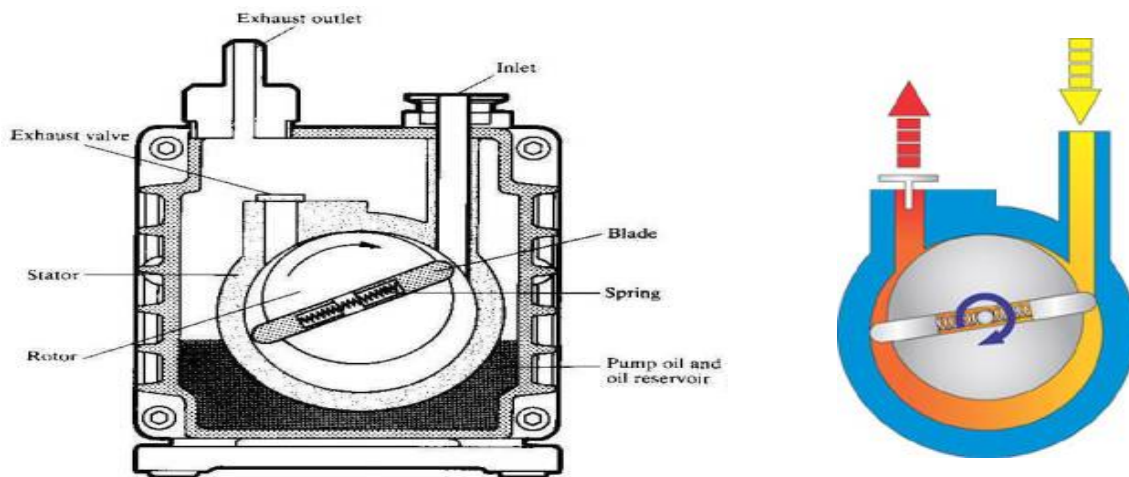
Electromechanical pumps with its main parts [Courtesy of (<http://rice.360.wildapricot.org>.)]
